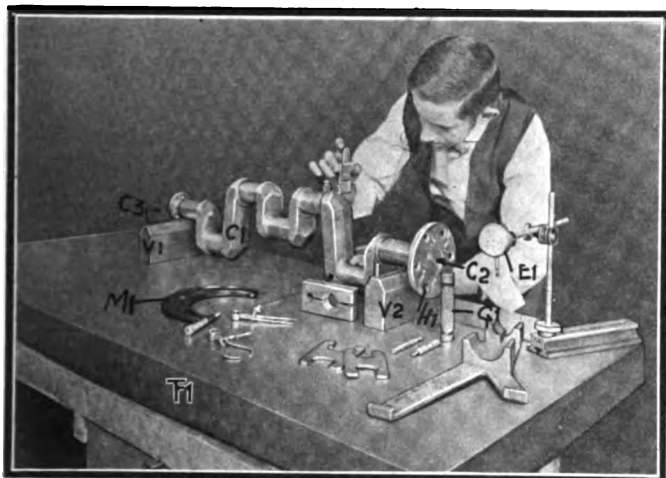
Inspecting crankshafts in the Packard plant, using micrometers, fixed gauges, and extensometers under proper conditions
